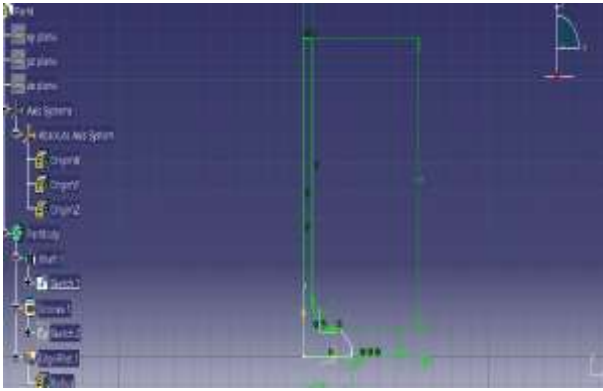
The dimensions of exhaust valve and seat angle, above figure shows poppet engine valve engine where all dimensions are in mm.
